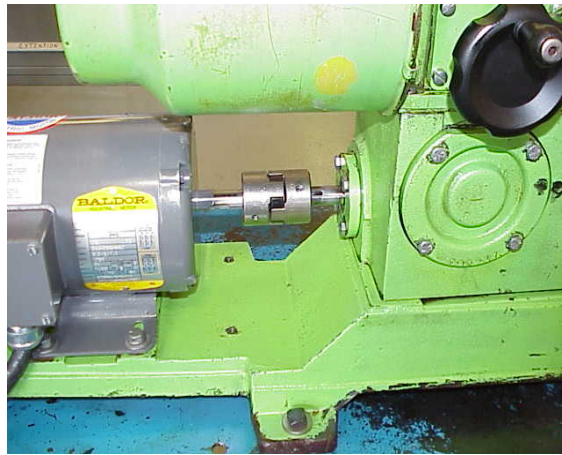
Motor Shaft Guard Removed to Show Flexible Coupling
